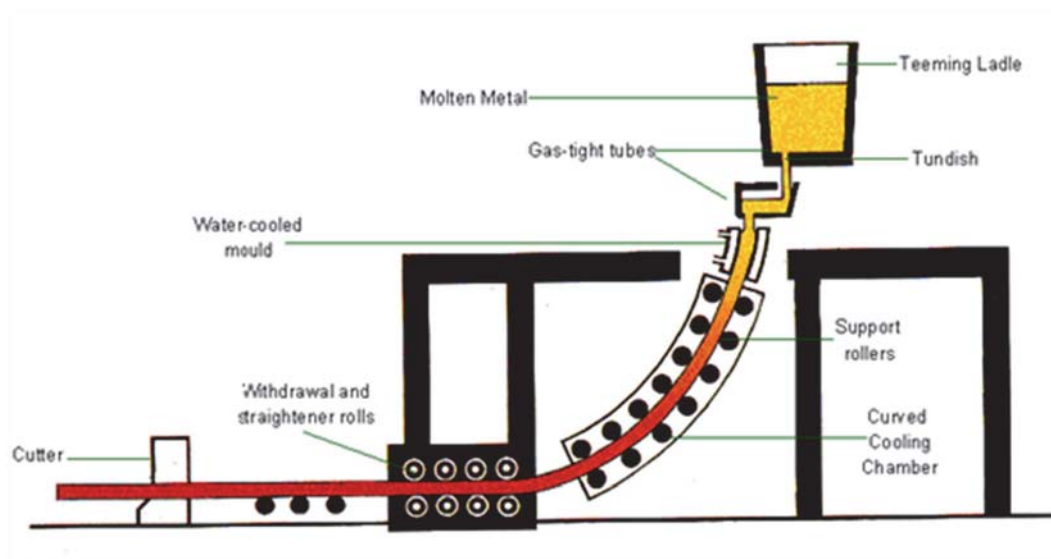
Continuous Casting Machine ⁽²⁹⁾
